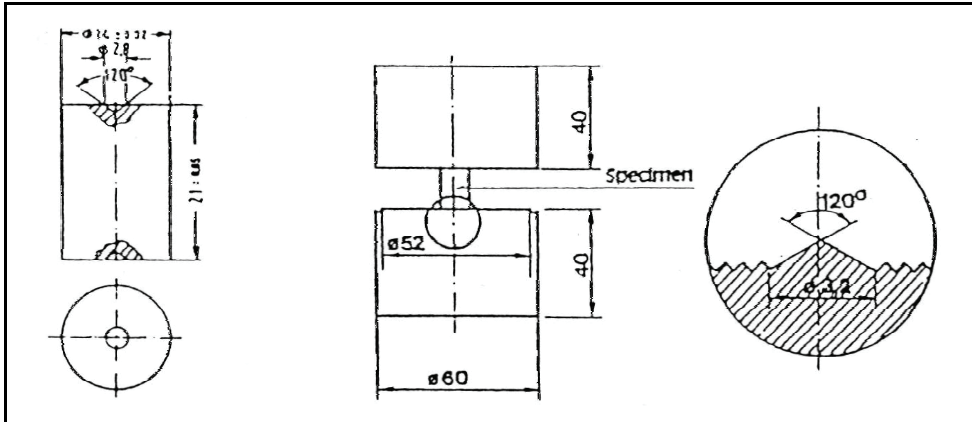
Test specimens and grooved dies used in standardized upsetting testing (Kudo, 1975).
